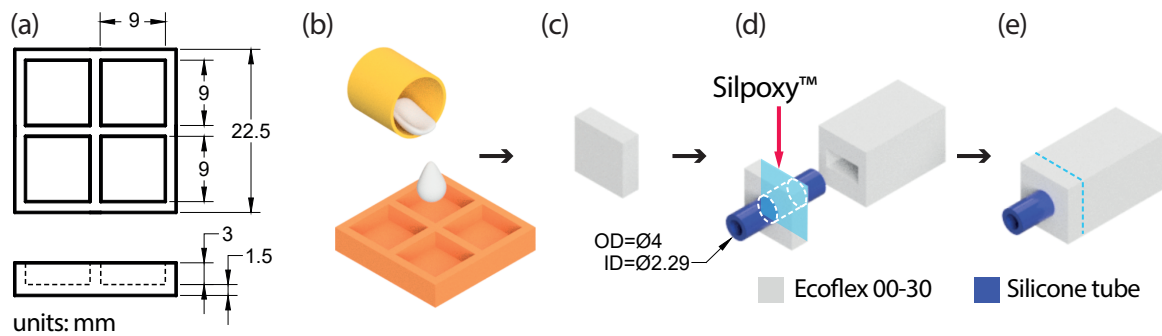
Sealing of the silicone chambers. (a) Dimensions of the mold to fabricate the caps. (b) Mold and (c) the resulting cap. (d) Diagram showing how the air inlet is assembled. (e) A sealed silicone chamber.
